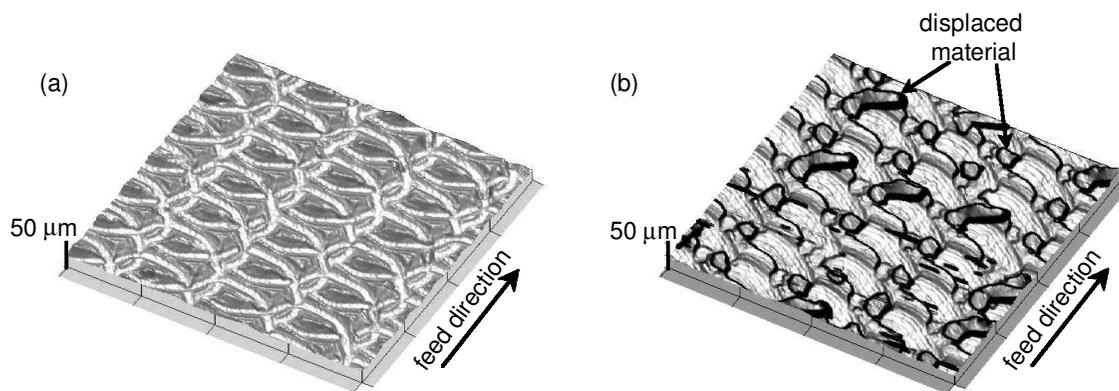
Three-dimensional topography of surfaces ($2\text{ mm} \times 2\text{ mm}$) machined with (a) a new carbide tool and (b) a worn carbide tool (0.3 mm maximum flank wear)
